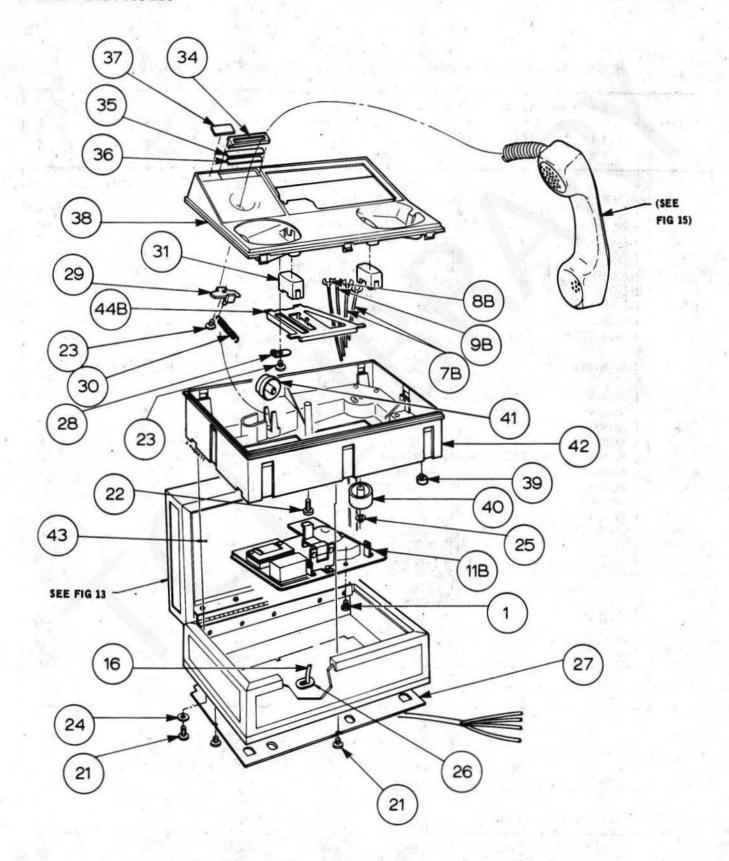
QSK400- and QSK2400-Type Chestphone Assembly of Parts (Table K)
